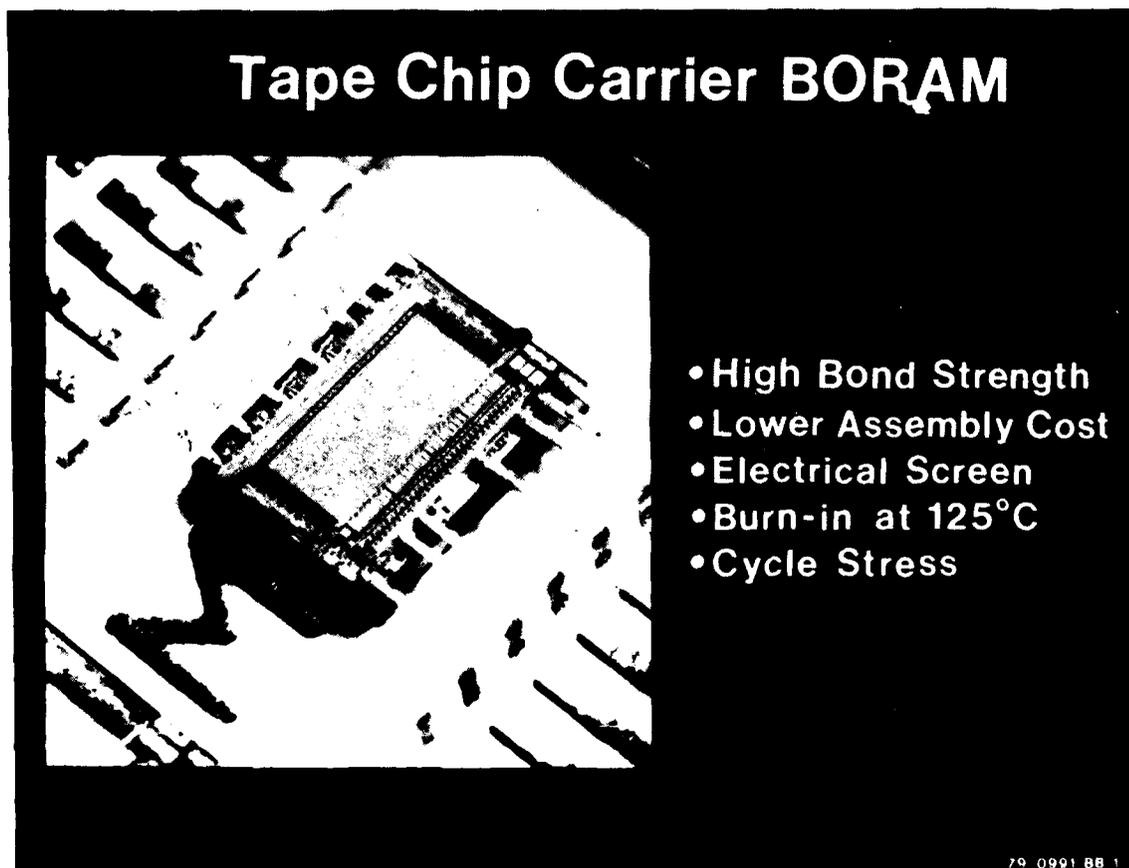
Close-Up View of Tape Carrier Bonded 6002 Chip
